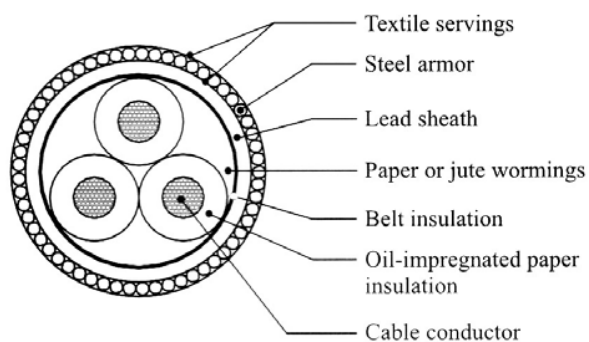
Cross-section of an Oil-impregnated Paper Insulated Cable
